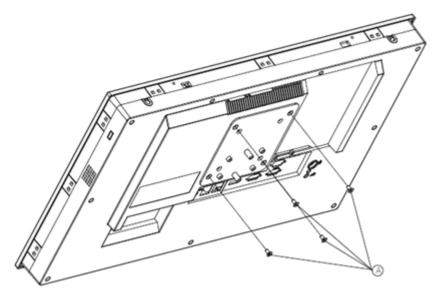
VESA mount screw holes2.Use the four M4 x 8L screws to secure the base plate to the mount stand.
